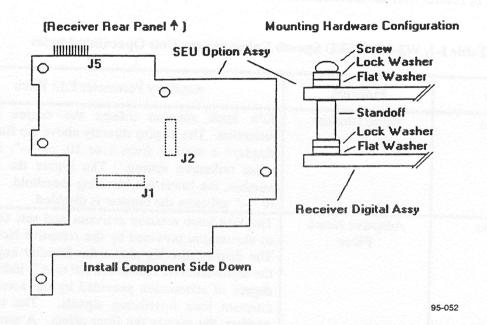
SEU Digital Expansion Assembly Hardware Illustration
